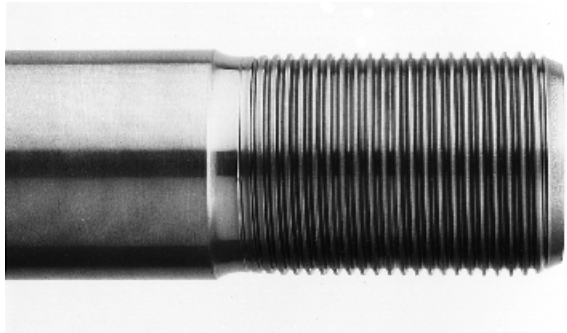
Rolled thread on a piston rod. (Dresser-Rand Company, Painted Post, N.Y.)
